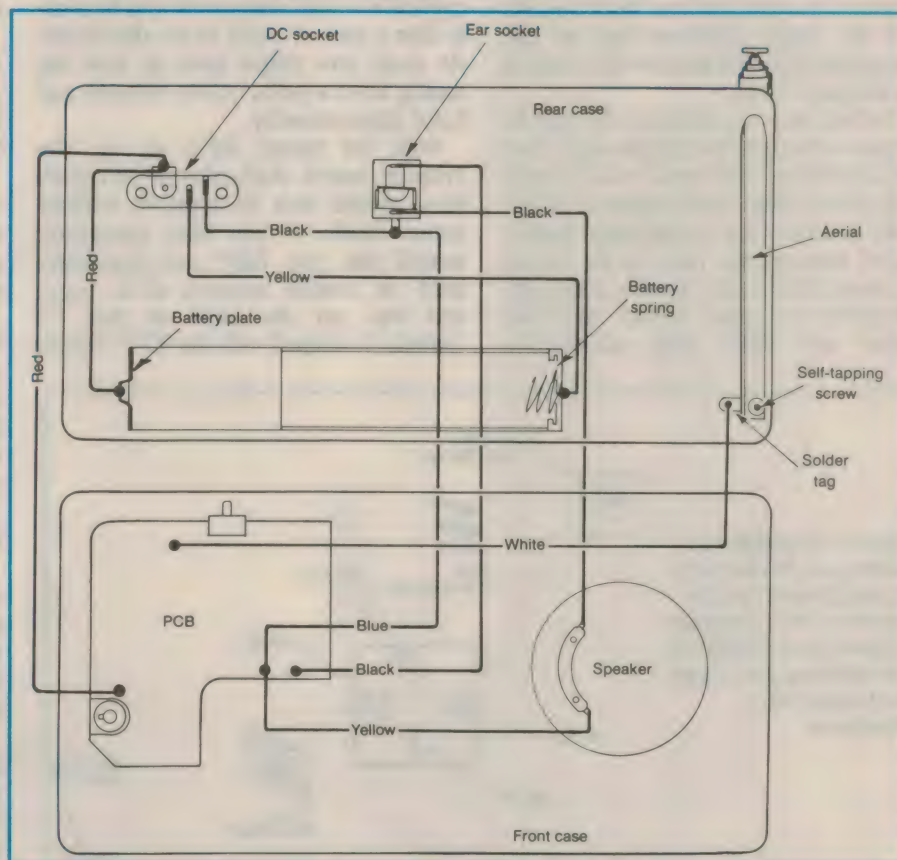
To guide you in wiring up the PCB with the other components, here is the corresponding wiring diagram. Use it in conjunction with the photographs, to make sure your unit is wired in the same way.
